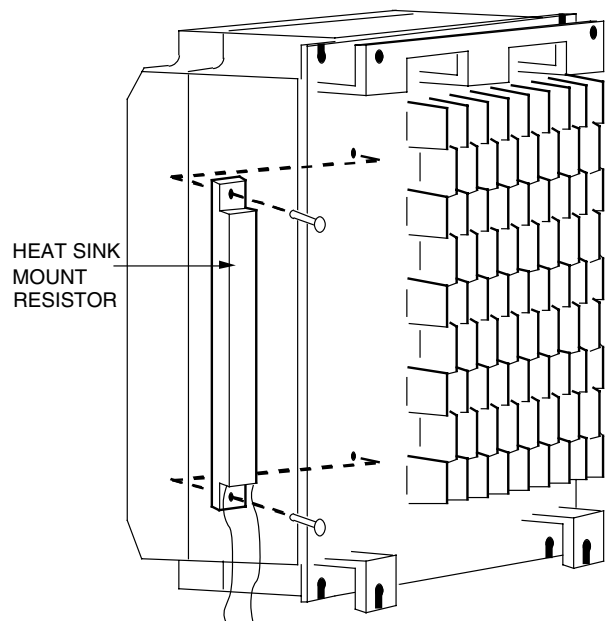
Attaching Heat Sink Mount Resistor on Heat Sink
